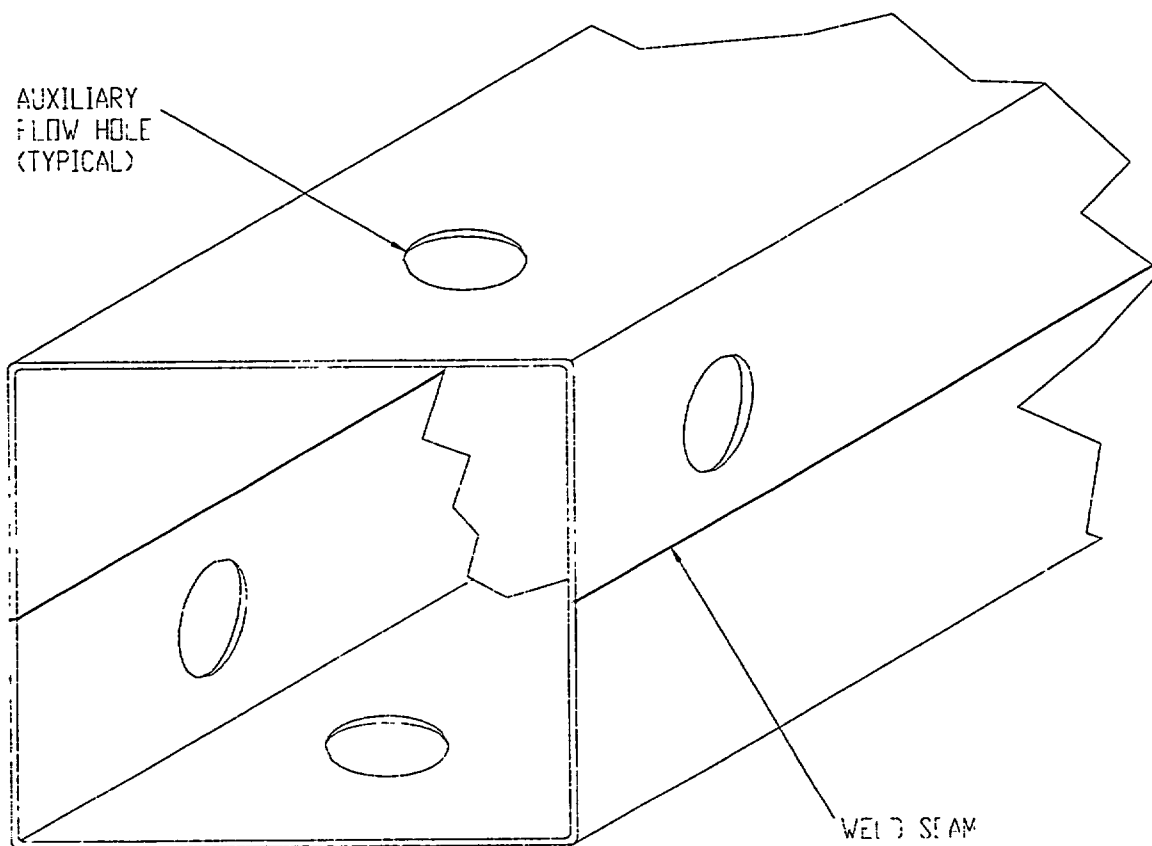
; SEAM WELDED PRECISION FORMED CHANNELS
